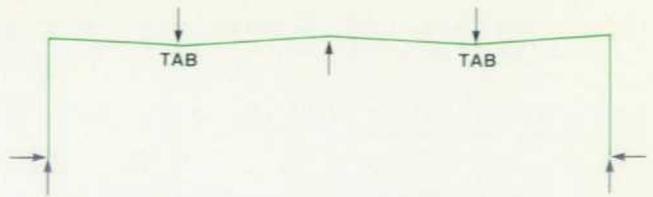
Side view of the isolated section's top shield showing the intentional double bow. The top shield snaps into a mating U-shaped shield without the use of a tool.
